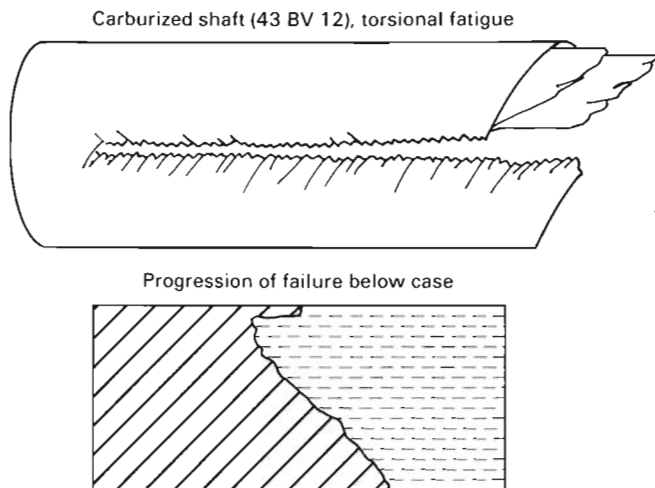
Schematic showing subcase failure of bidirectional torsional shear fatigue followed by torsional tensile failure of the case.
